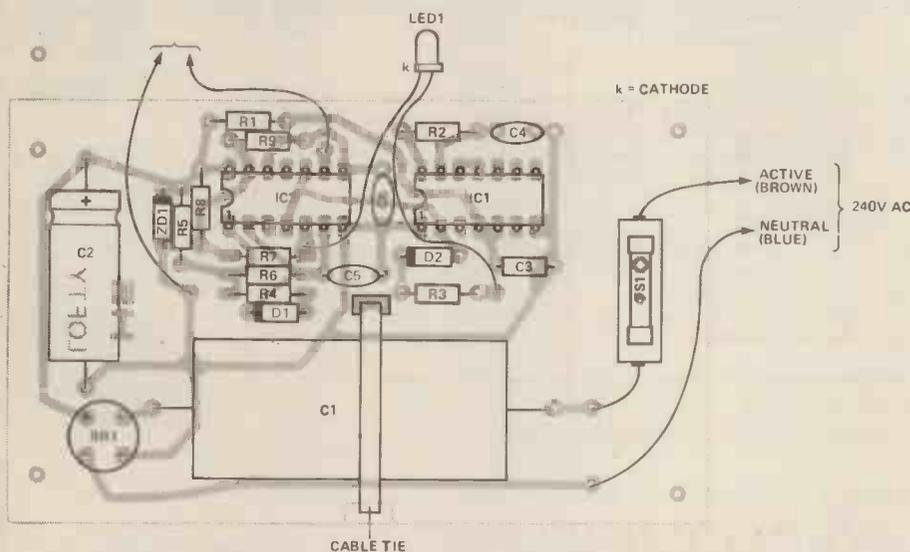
The PCB component overlay. Capacitor C1 takes up most of the board space!
